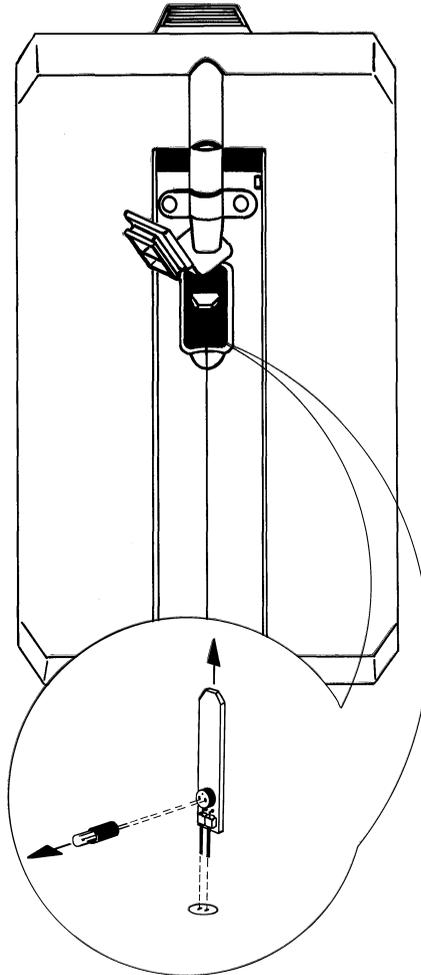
The sketch shows how the Tracklight bulb (6.3V /0.2A) should be removed from the connection socket.
